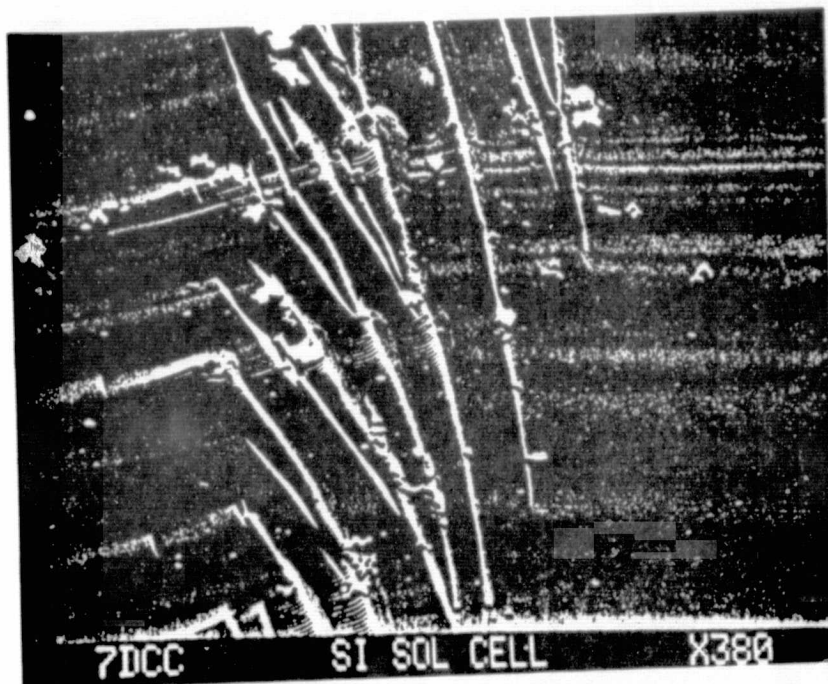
Silicon Fracture Surface, 380 X, Below Metal Trace
